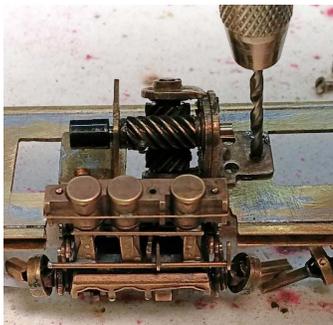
A snugly fitting drill bit can be used to easily mark hole centers when mounting parts that have been temporarily glued into place.
